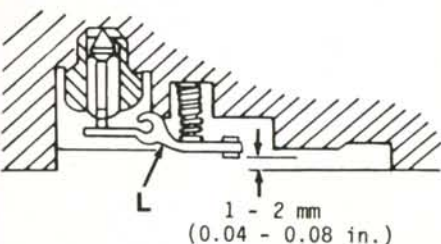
Inlet needle valve lever (L) should be 1-2 mm (0.04-0.08 in.) below surface of carburetor housing when needle valve is seated.
